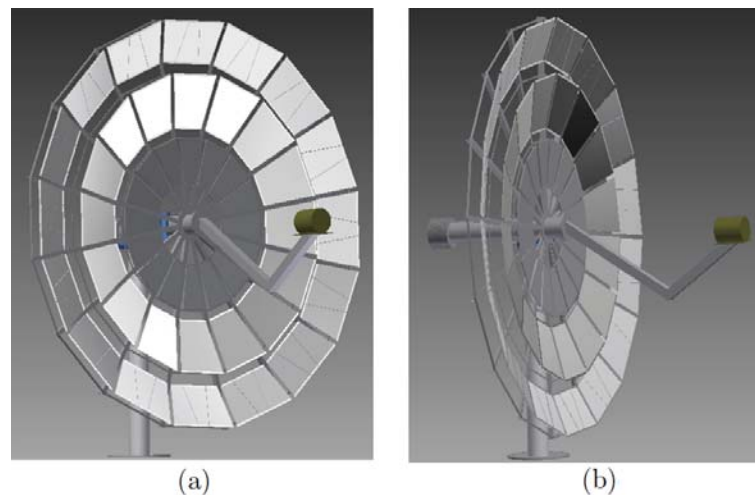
CAD drawings of the proposed solar concentrator fully assembled.
